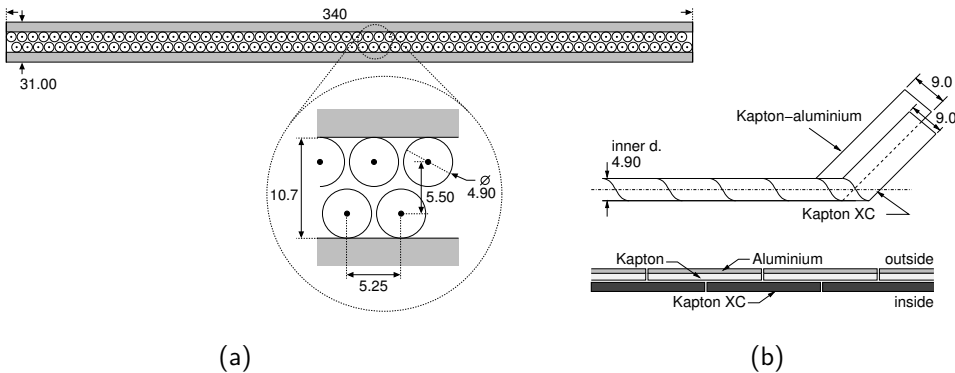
(a) OT module cross section, dimensions in mm. (b) Straw winding of the drift straw tubes, dimensions in mm. The straws are wound using two foils, Kapton-XC and a laminate of Kapton and aluminium.
